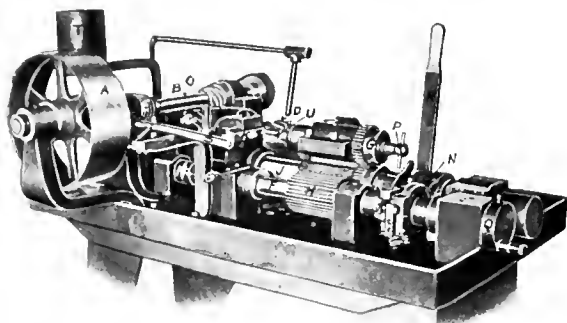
Mechanism of the Bickford & Washburn Tap Machine.
